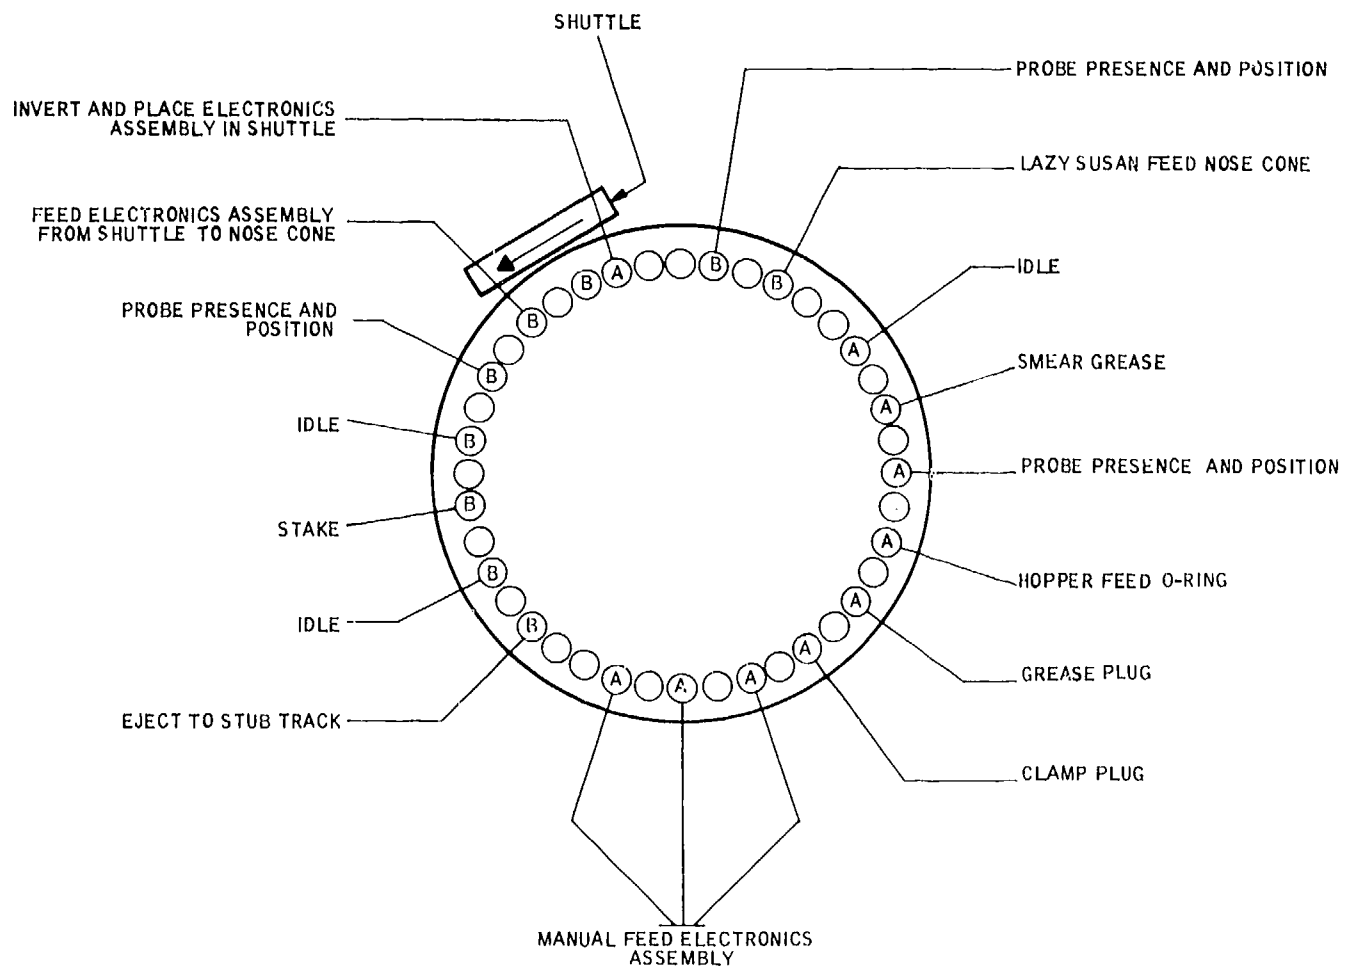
Dial schematic, machine E3 - electronics and nose cone assembly
